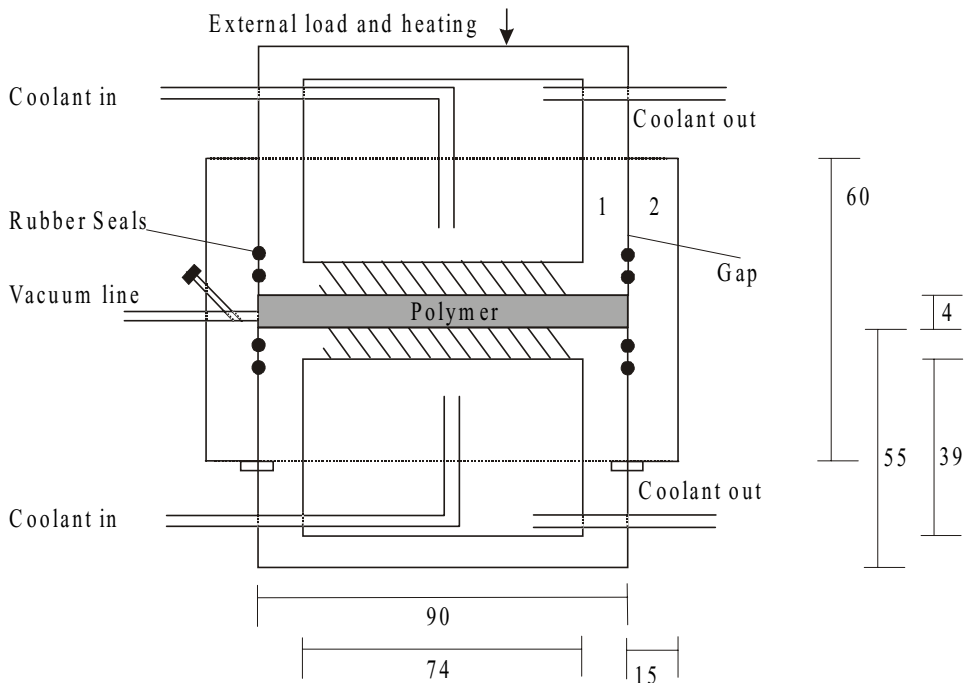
Schematic drawing of the compression mold. The dimensions are given in millimeters.
